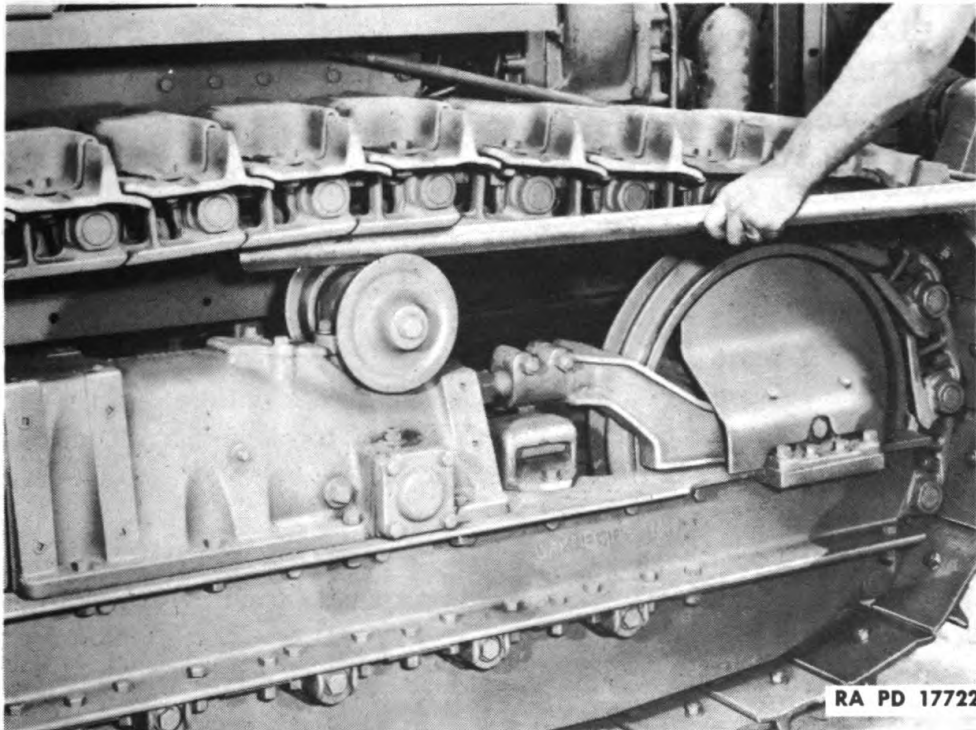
Loosening Steering Clutch Adjusting Screw Lock Bolt
